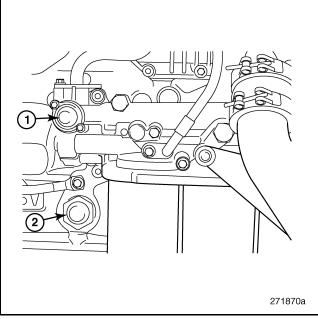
Oil Valves — Thermostat and Pressure Safety
